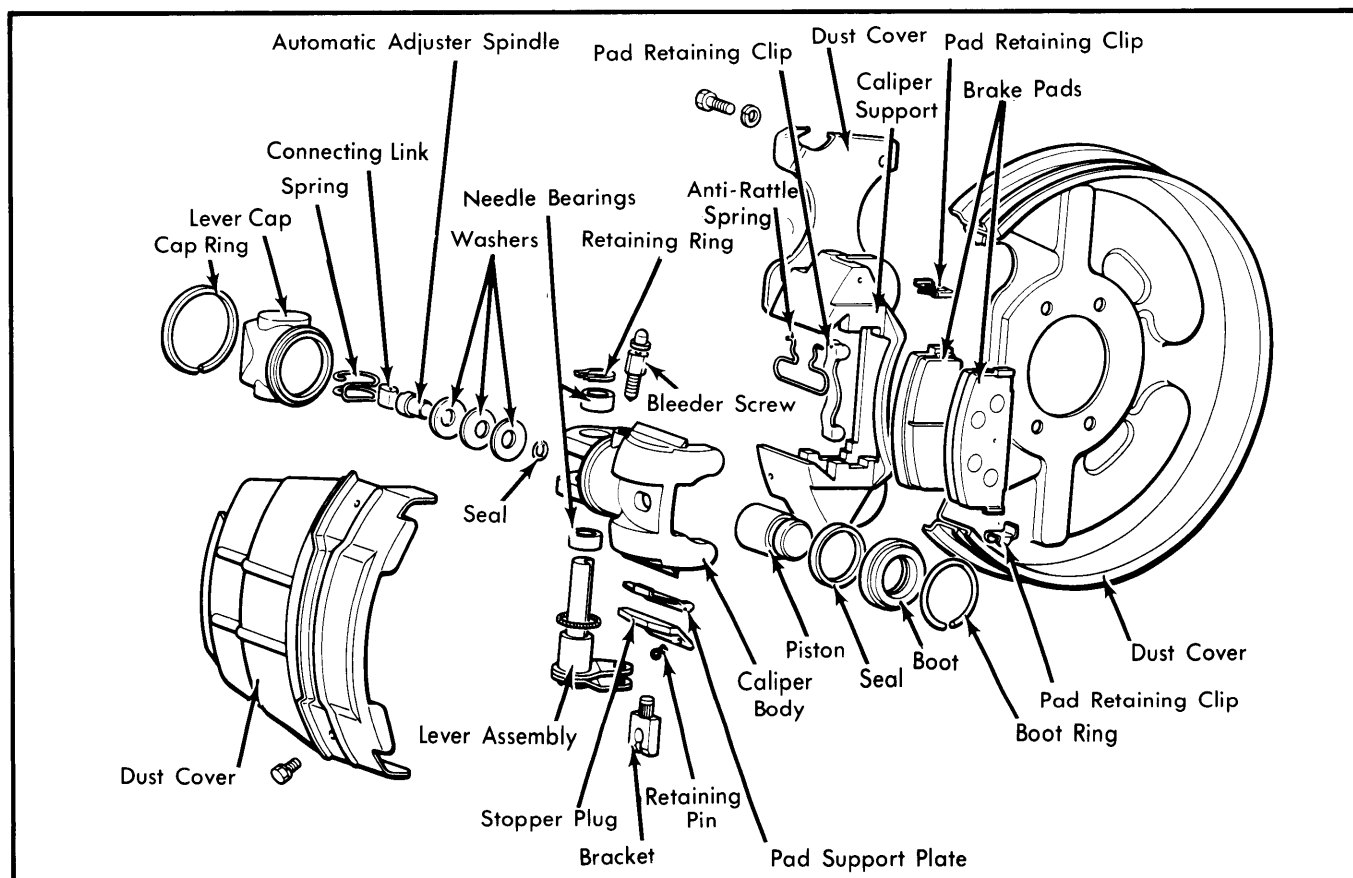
Exploded View of Rear Disc Brake Caliper Assembly
